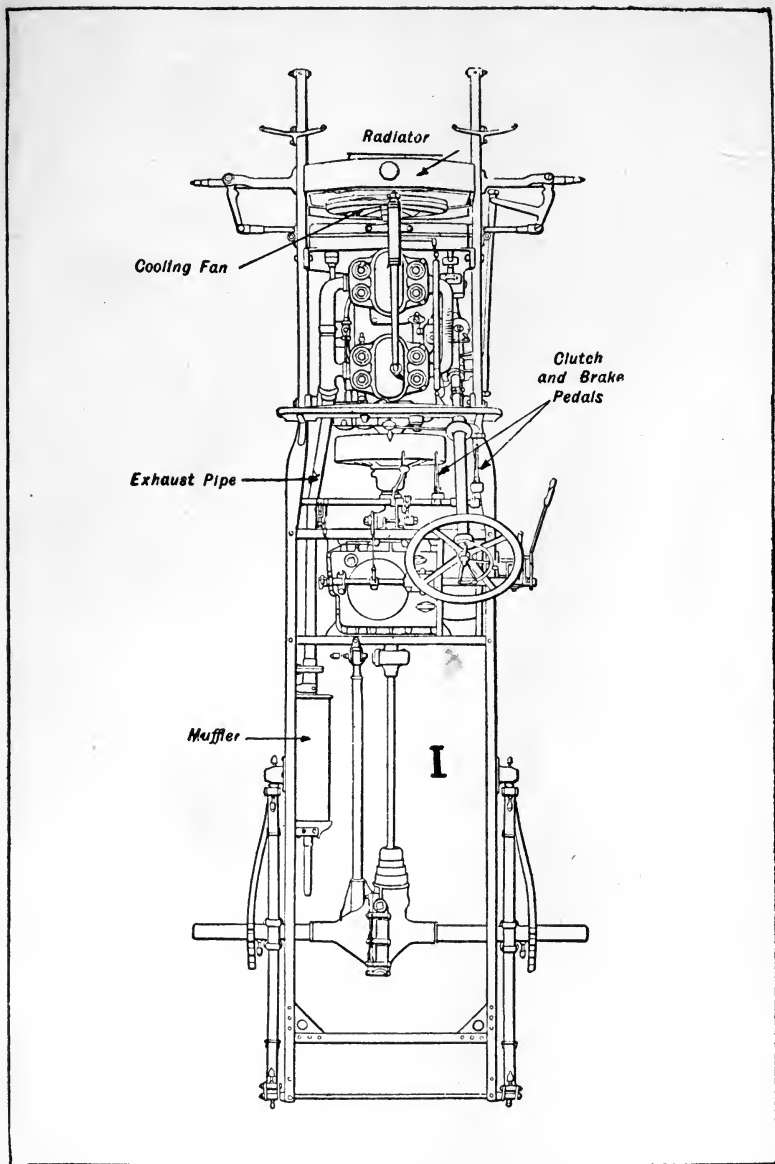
Plan View of Chassis when Radiator, Cooling Fan, and Muffer have Been Put in their Proper Places.
